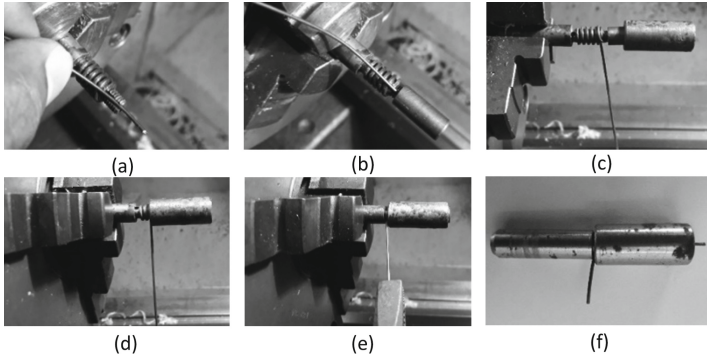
Raw NiTiNOL wire fixing method: (a) positioning the VAL; (b) tightening VAL by the positioner; (c) winding the wire; (d) constraining by the sleeve; (e) tightening the sleeve; (f) wire and the fixture before shape setting.
